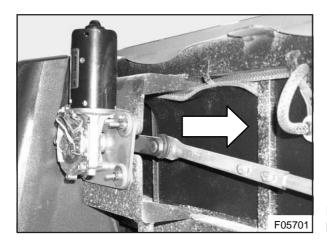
Wiper linkage, final installation with righthand wiper tie bar pointing towards coach access door
